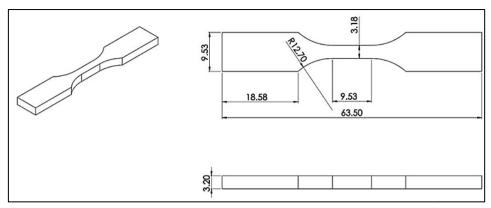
Tensile test dimensions according to ASTM D638 (type V)
